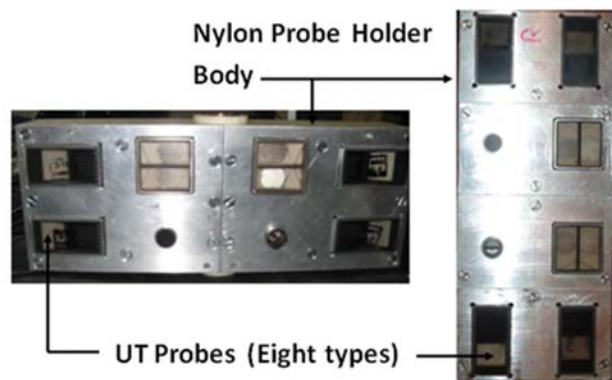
Horizontal Probe Holder Assembly (left); Vertical Probe Holder Assembly (right)
